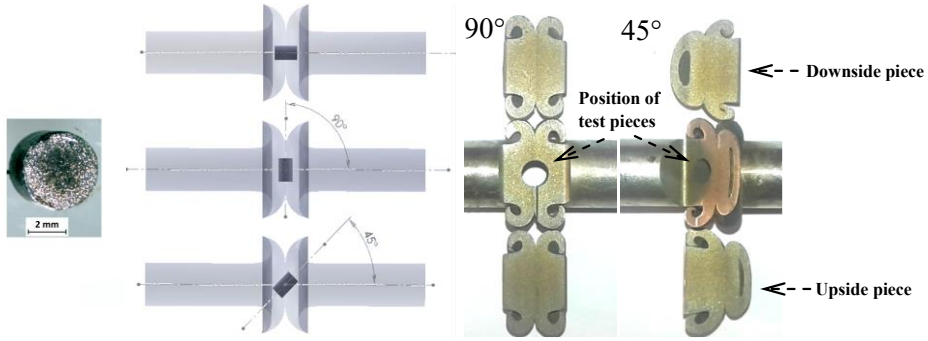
Compression test pieces and the extracted position from three angles of 0°, 45° and 90°
